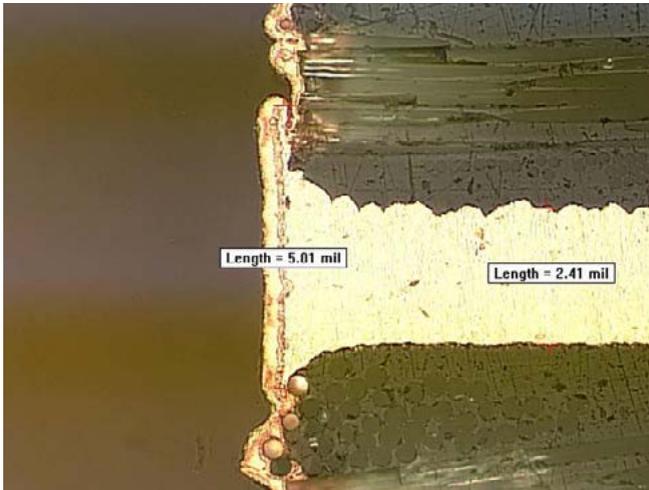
Excessive nailheading (a.k.a., the wall of shame).
